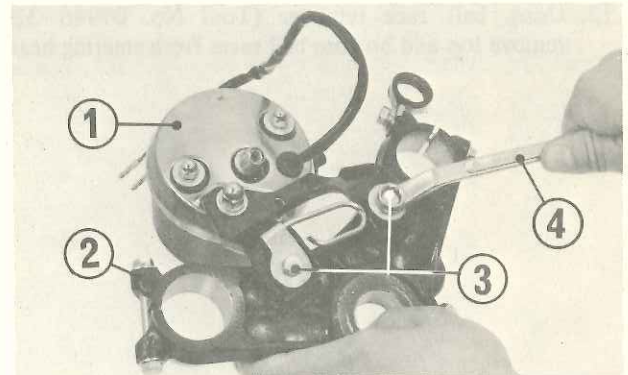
(1) Speedometer (2) Fork top bridge (3) 6 mm bolts (4) 6 mm spanner
